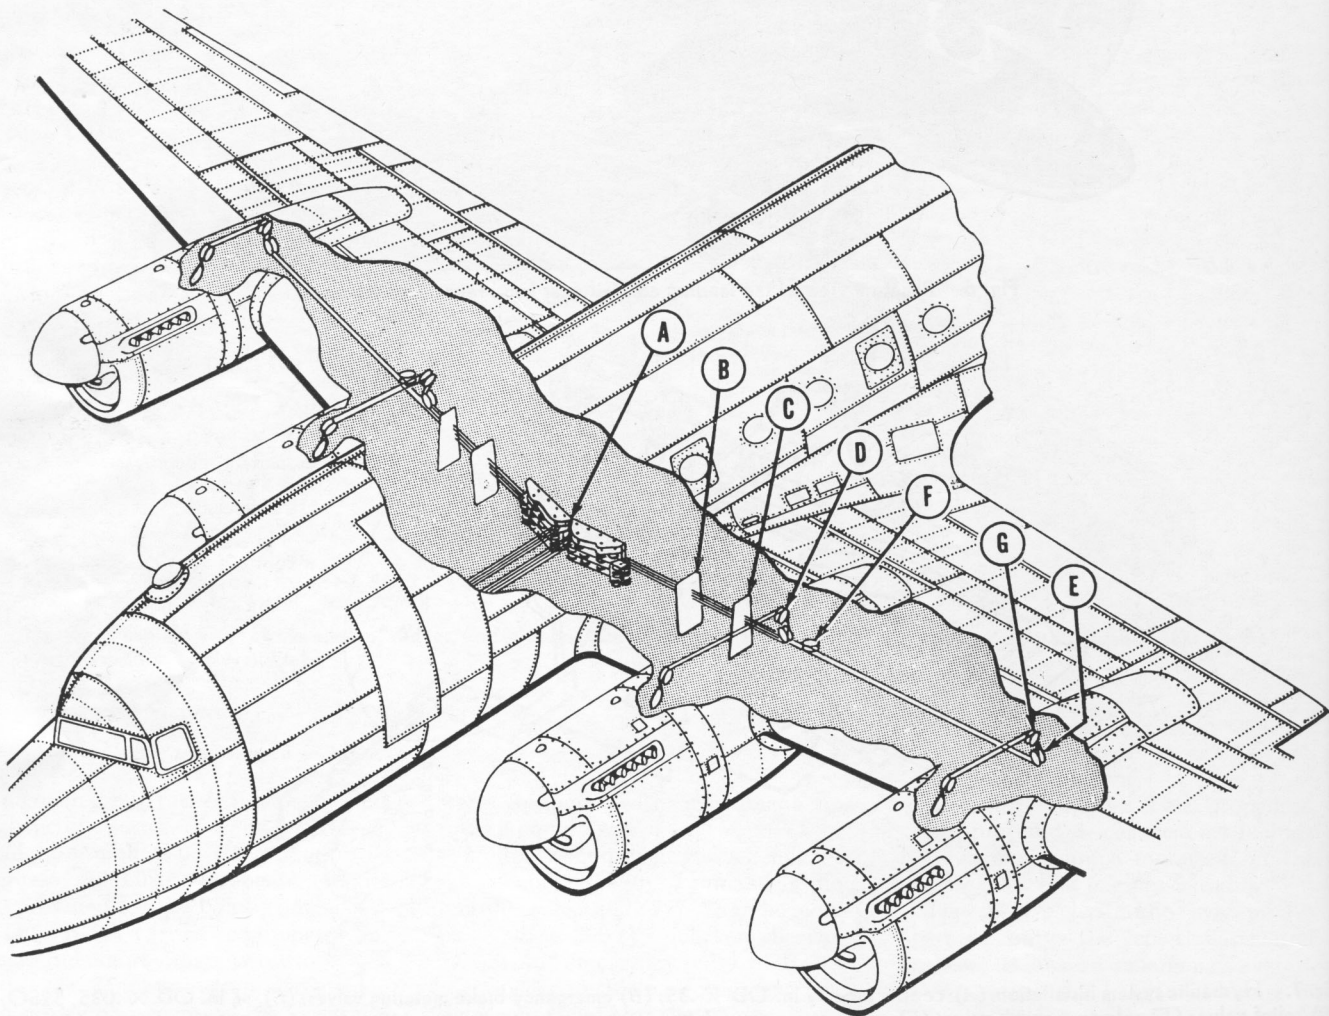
Throttle control system of the North Star: (A) front spar pulley bracket; (B) cable fair-leads; (C) cable fair-leads; (D) inboard nacelle engine control bracket; (E) front spar throttle pulley bracket; (F) front spar control pulley bracket; (G) left outboard nacelle engine control bracket.
